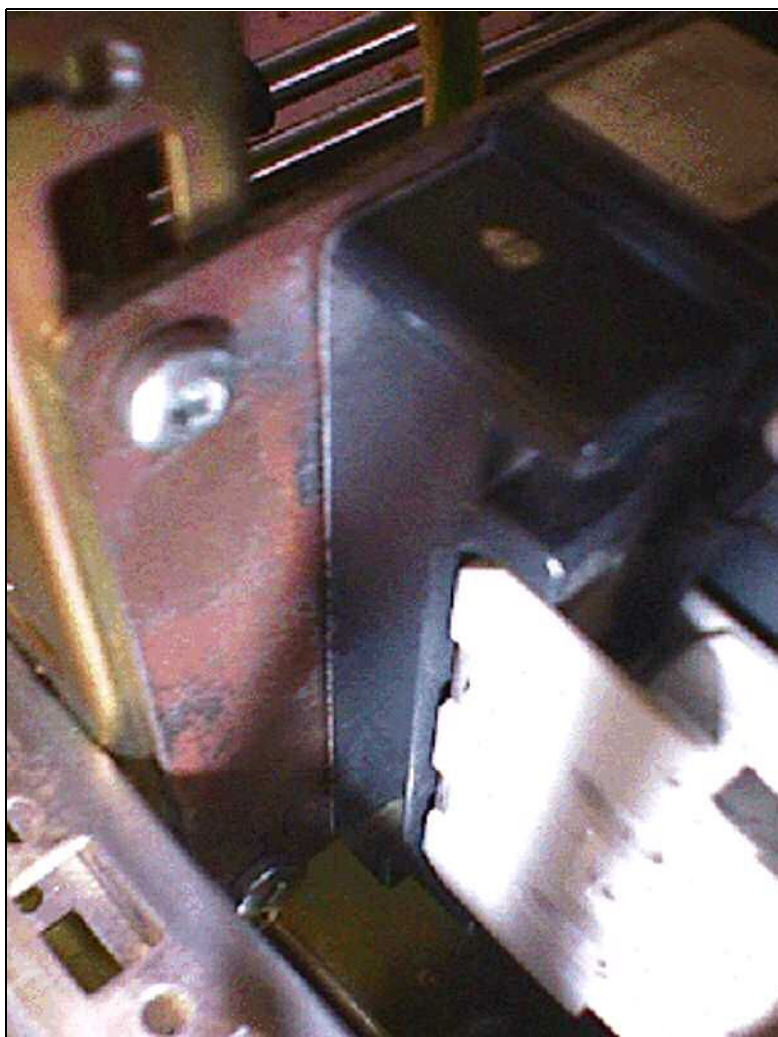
Stabilizing screw (3 mm Allen) on lower left of main contactor
